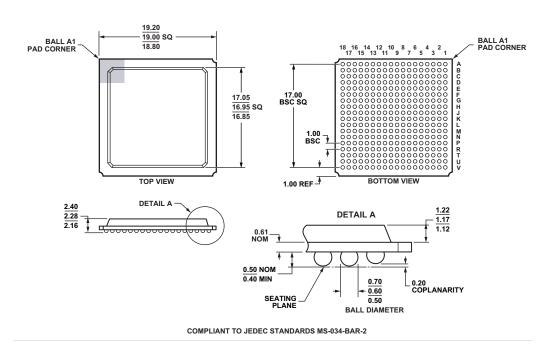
324-Ball Plastic Ball Grid Array [PBGA] (B-324) Dimensions shown in millimeters
